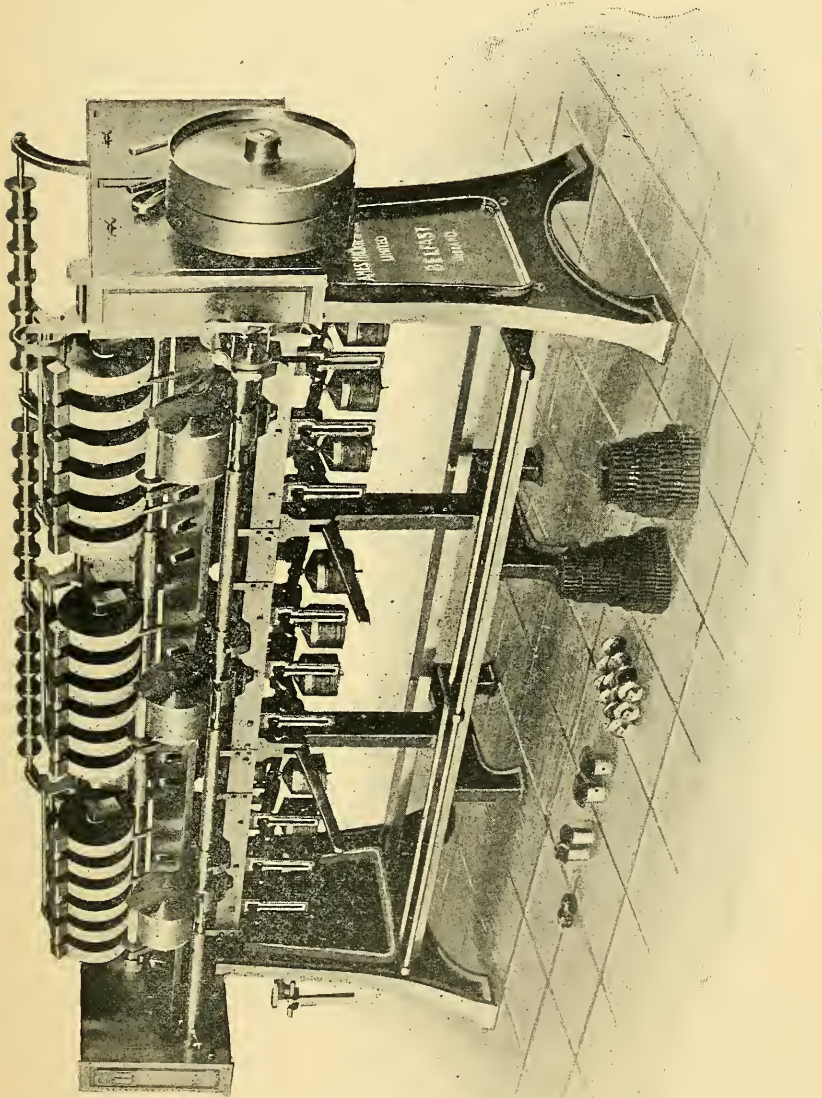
Spiral drawing frame for flax or hemp tow (front view).
